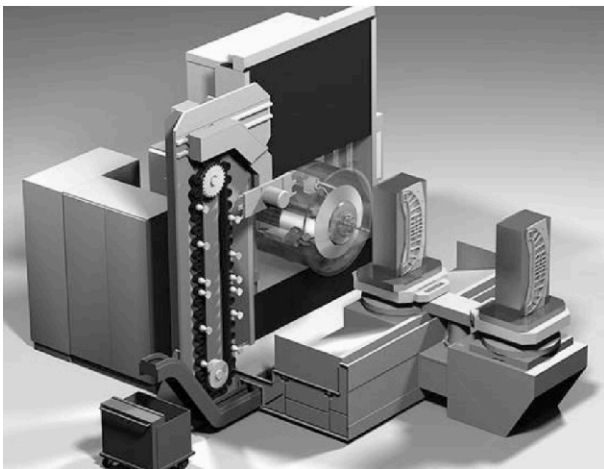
ECOSPEED F HT 5-axis machining center with parallel kinematic machining head Sprint Z3 [50]
